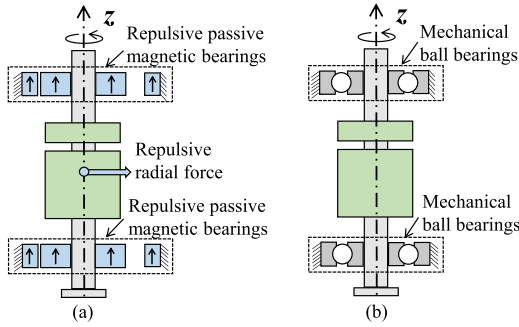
Basic principle of radial suspension of the rotor shaft with (a) RPMB and (b) mechanical ball bearings.
